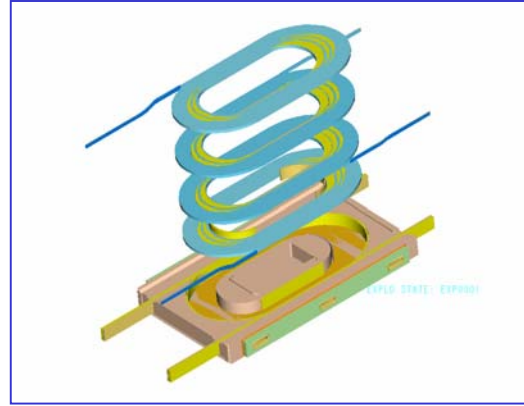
The engineering designs of coil, coldmass and the magnet test setup.
